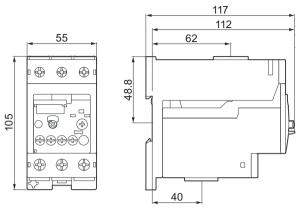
3RU2136-..B1 and 3RU2936-3AA01
